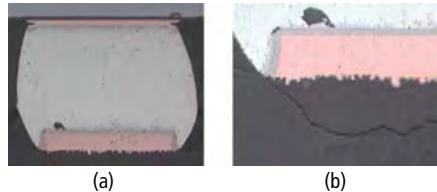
Cross-section images (a) solder joint between WLP and board, (b) resin crack on board side after 500 drops
